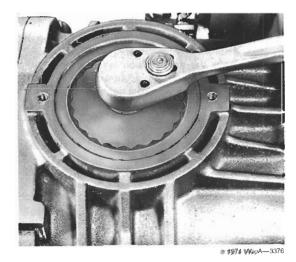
Tool VW 231/15 being used to remove an adjusting ring from a late transmission.
